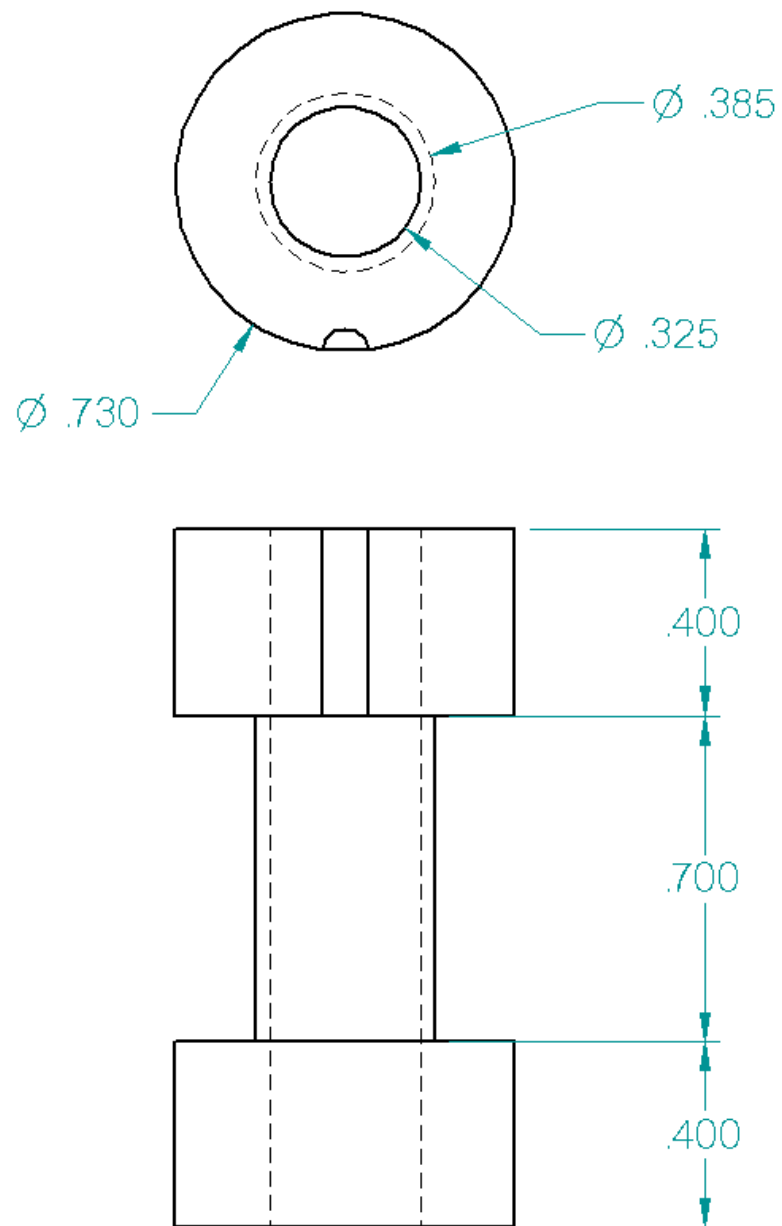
Pick-up coil spool for modified transducer made of Aluminum 6061-T6.
